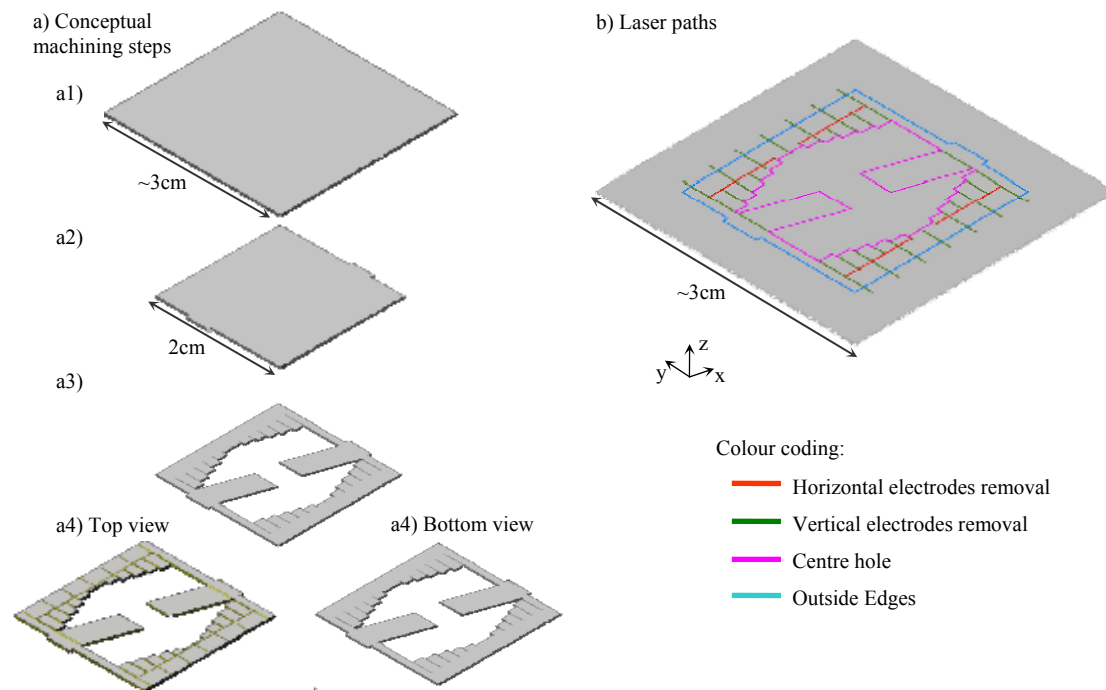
a) Required machining steps of an initially oversized PZT sheet with platinum electrodes to obtain the actuator layer for the spider MOA: Cutting out of the outside edges, Cutting of the centre hole and, if required the trenches to define the level B; and machining of the top platinum layer to define the segmented electrodes whilst maintaining an continuous ground electrode on the bottom layer of platinum. b) Laser paths to implement the conceptual machining steps for the 24 leg spider.
